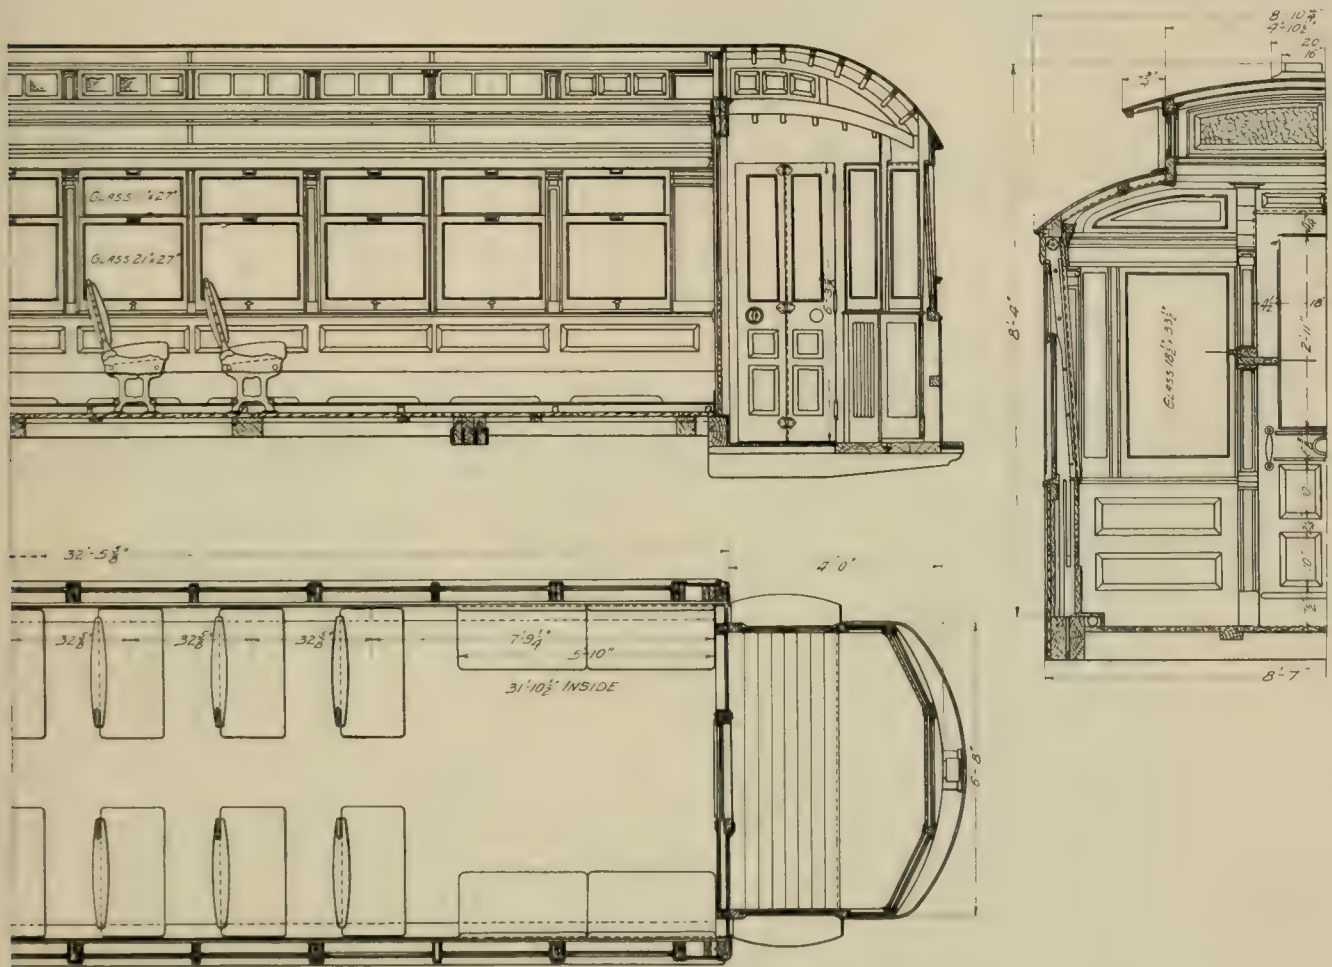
INSIDE FINISH OF STANDARD 32-FT. 5-IN. BOX CAR.
